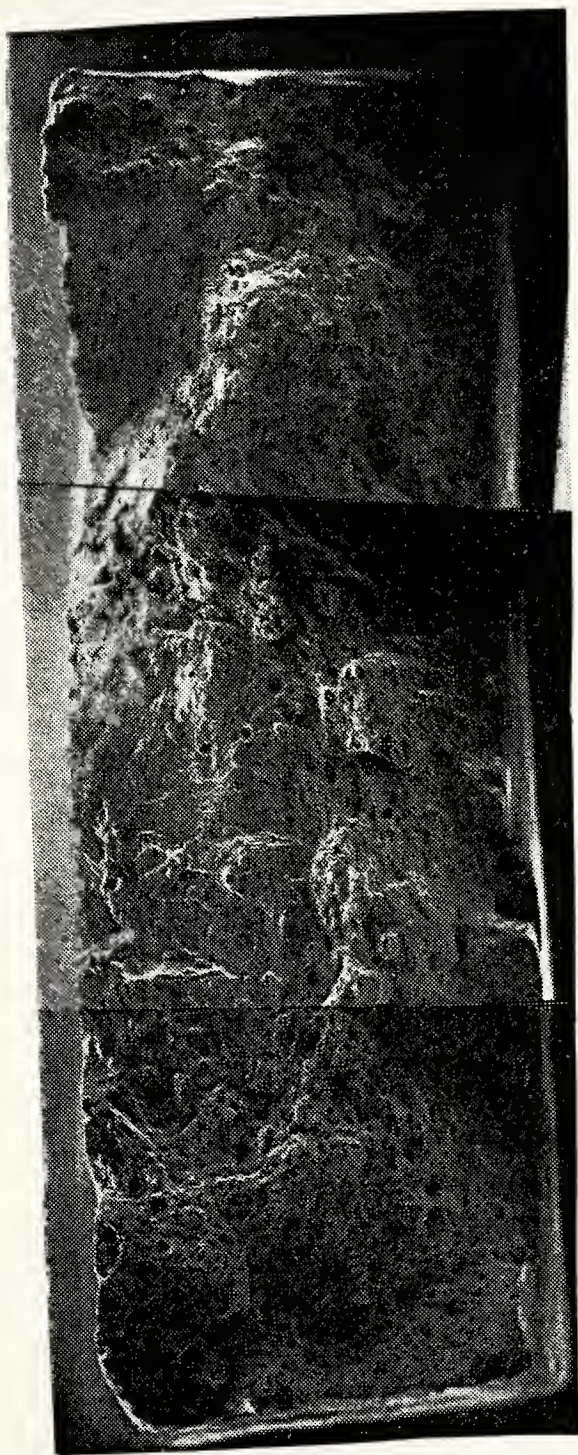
Observation of the entire fracture surface of a 14 weld-repaired sample. (24X). A very large ductile overload zone porosity are apparent.
